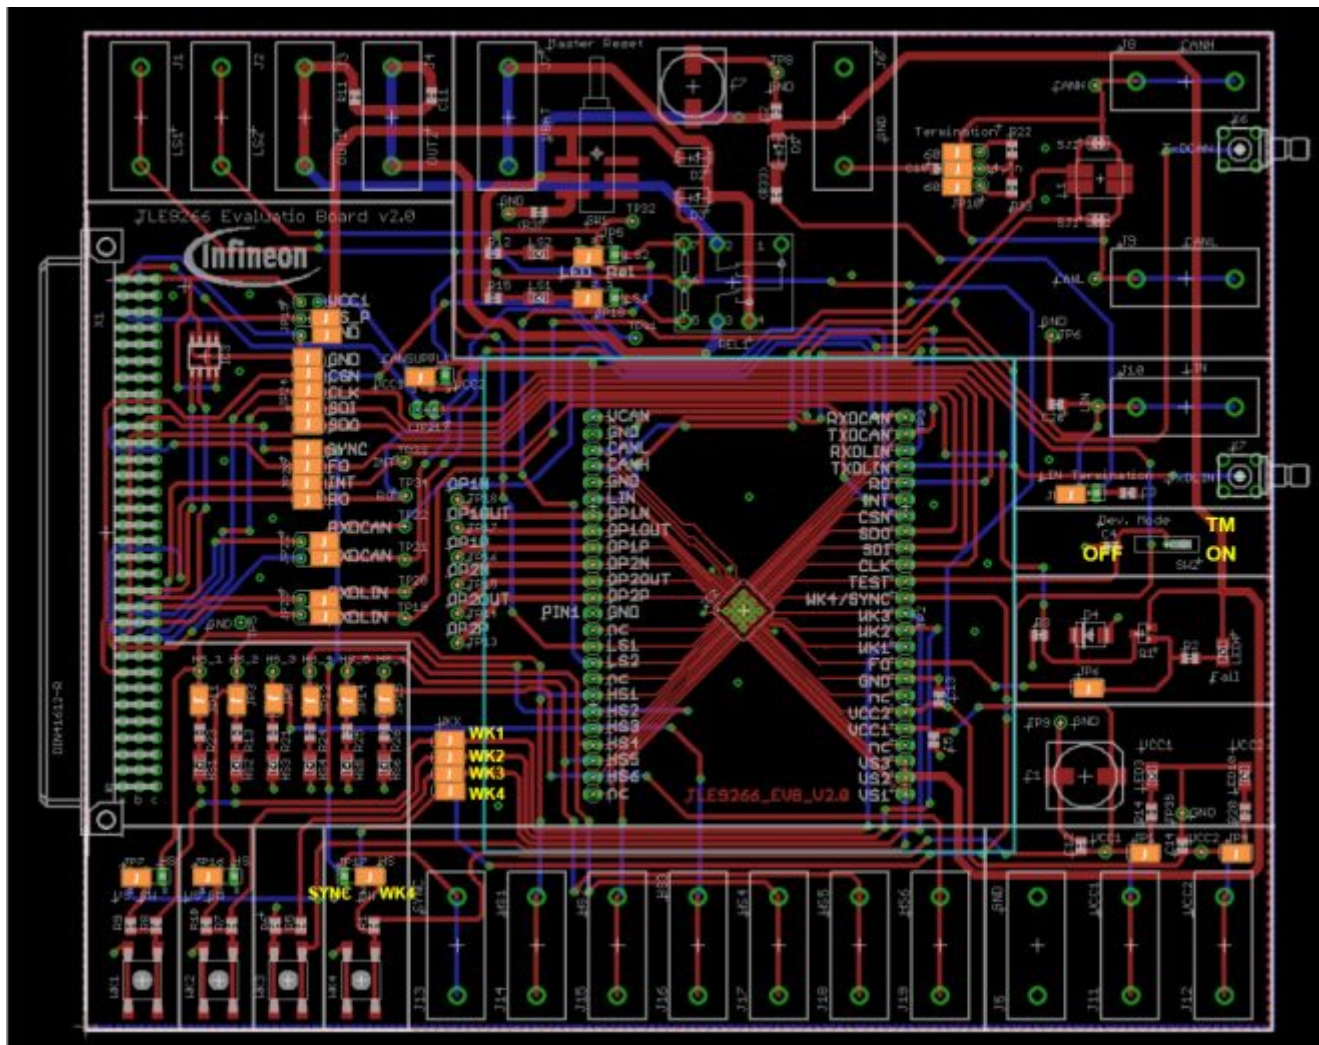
Driver SBC Evaluation Board Layout including default jumper settings.
